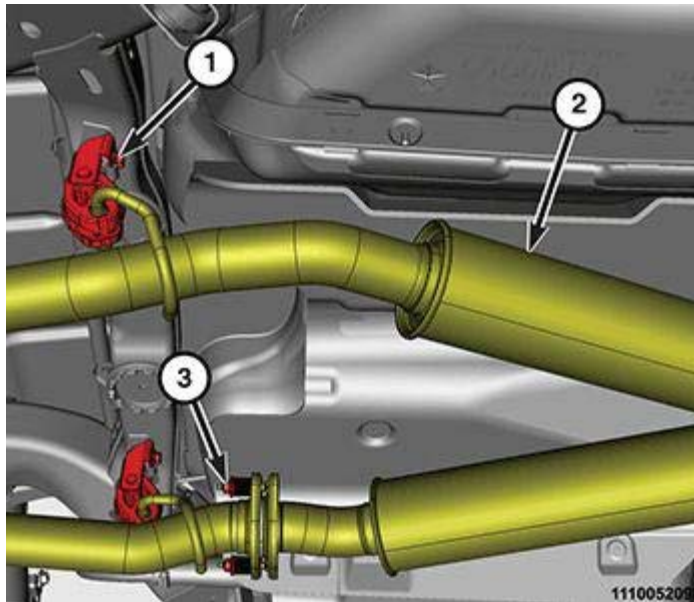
Front Isolator Mounting Bolt, Left Side Resonator And Tailpipe Assembly Flange Nuts
